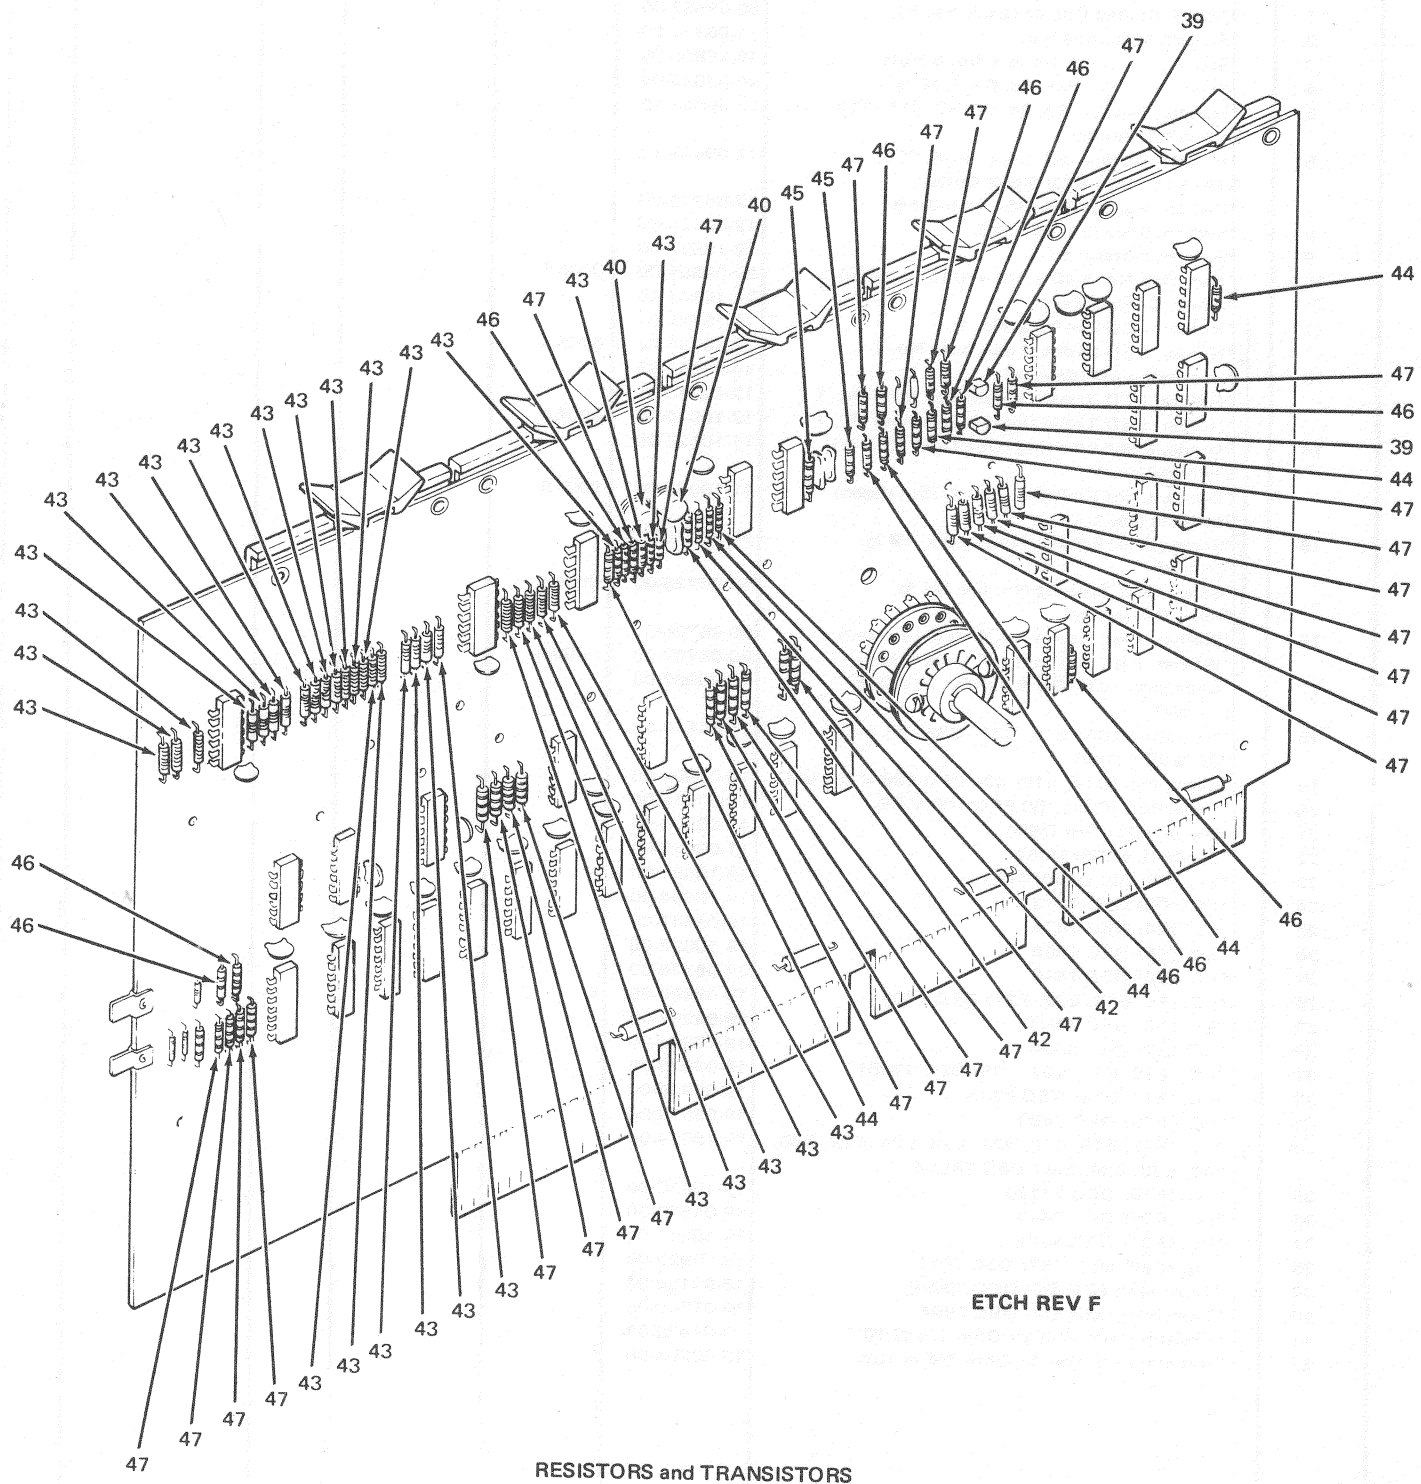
A. Front Panel Control Board Assembly (Etch Rev F) Sheet 3 of 3
